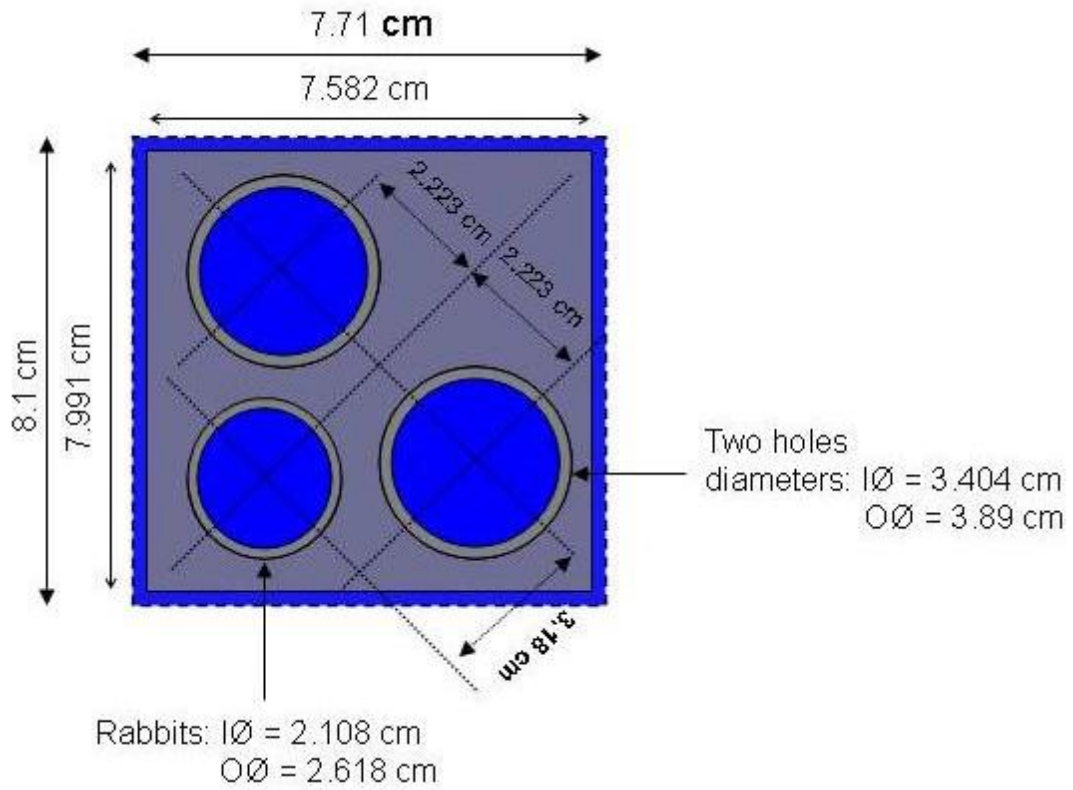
Radial View of the Solid Aluminum Type Reflector Assembly. [1]
